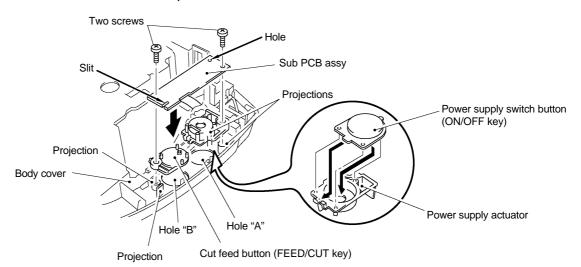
Reassembly of the Button and the Sub PCB Assy
